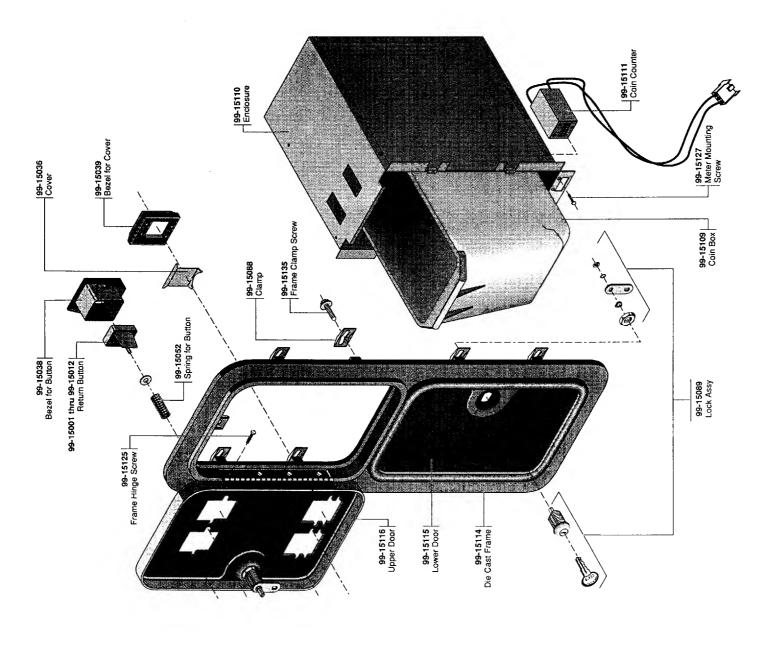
Coin Controls, Inc. Coin Door Assembly 171093-001
